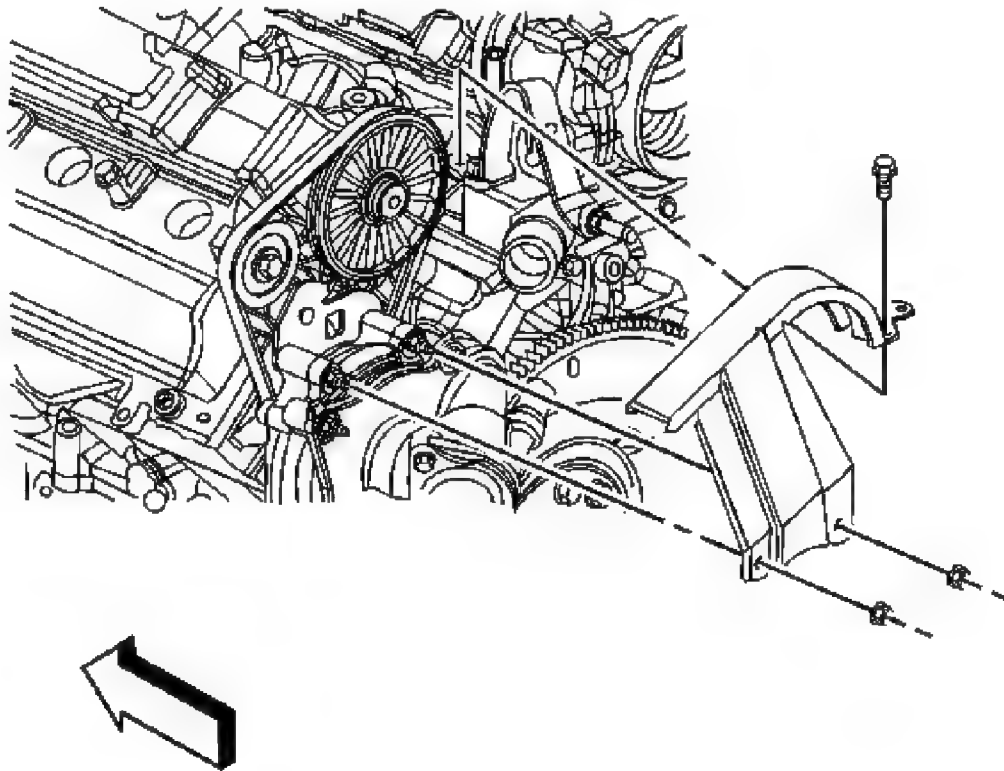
View Of Water Pump Drive Belt Tensioner Shield
